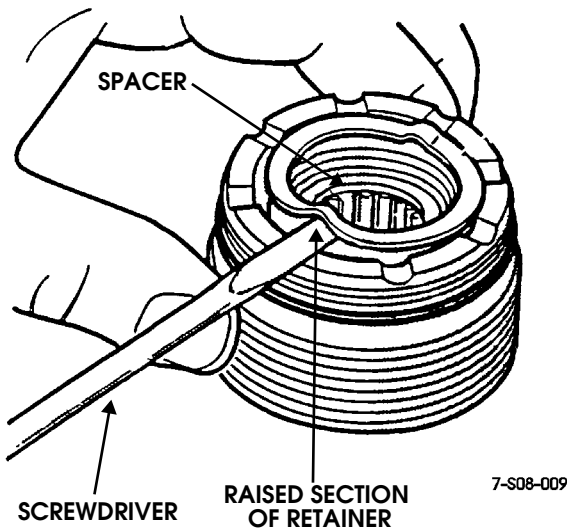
Adjuster Plug Thrust Bearing Retainer Removal
